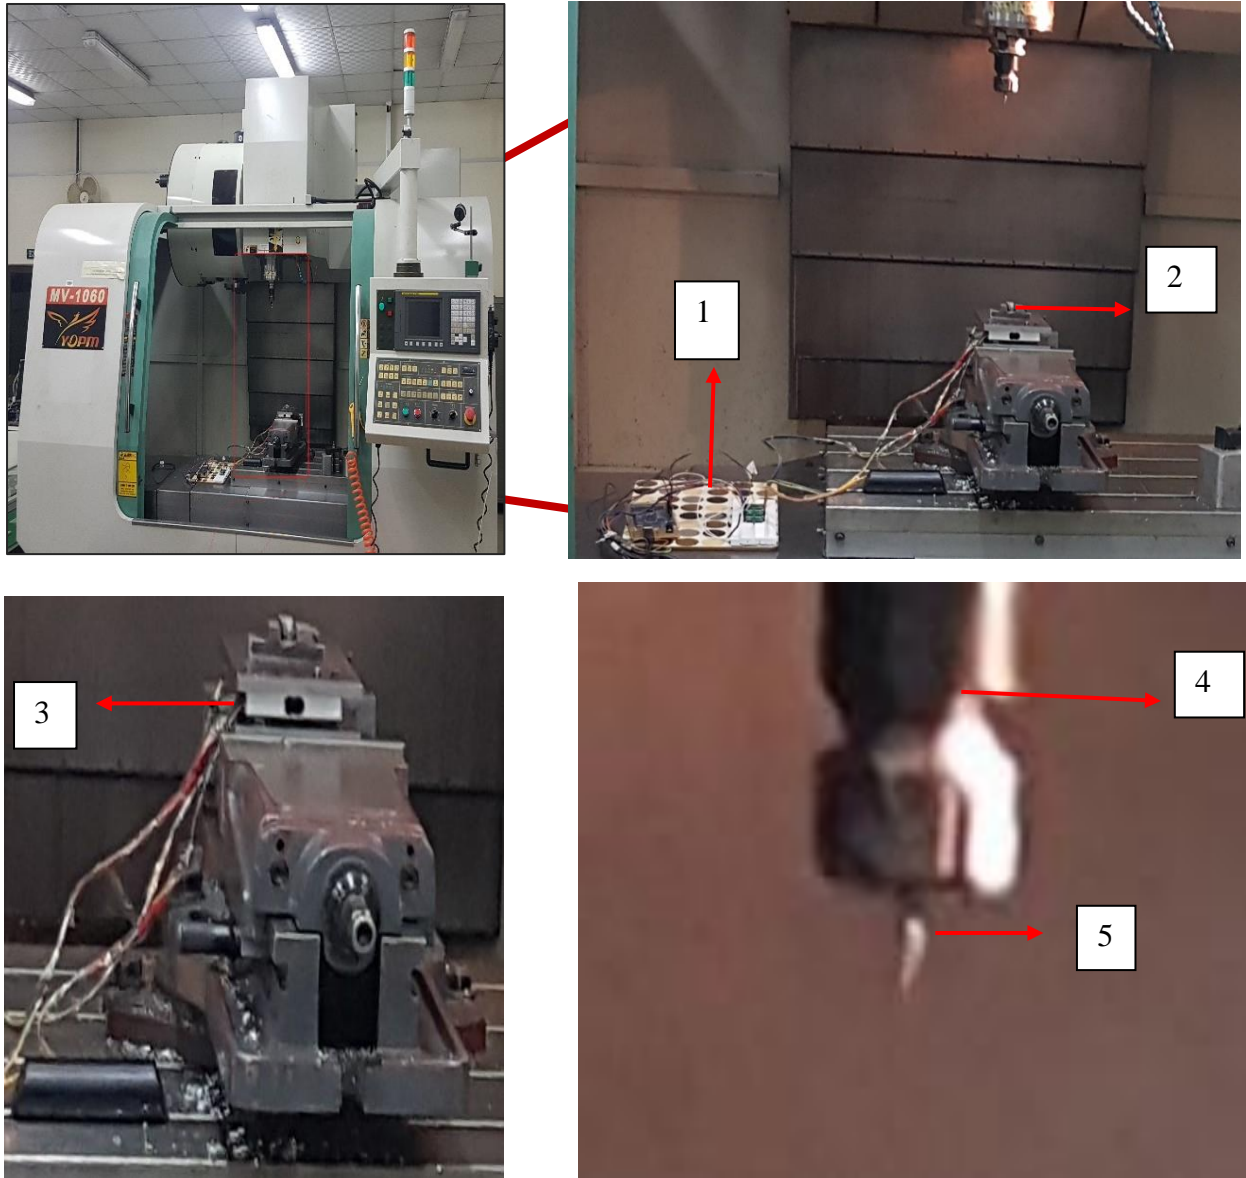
(1) Arduino (2) Workpiece (Ti-6Al-4V) (3) Load Cell Dynamometer (4) Spindle (5) Carbide End Mill cutter
